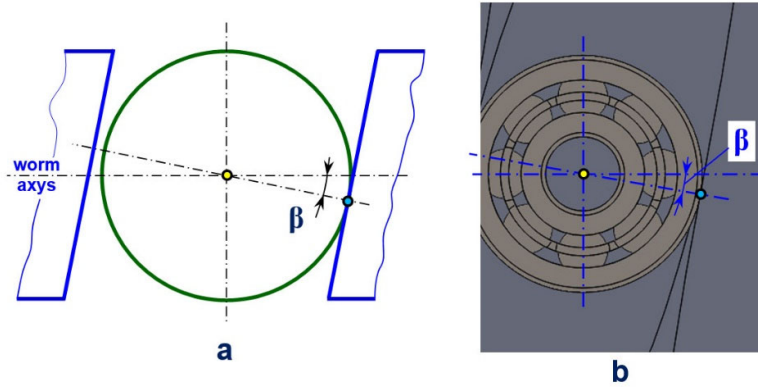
The worm-bearing contact: (a) 2D worm-bearing contact, (b) 3D worm-bearing contact.
